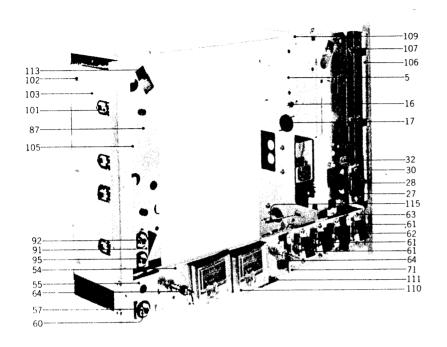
PHOTO OF OSC. POWER P.C. BOARD (LE-5021)
